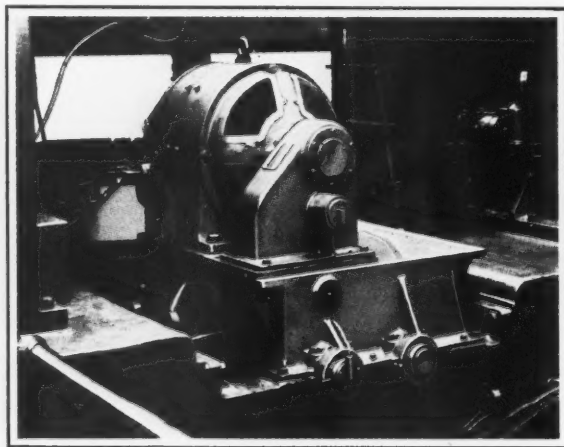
Arrangement of the Speed-box and Table Drive Motor
